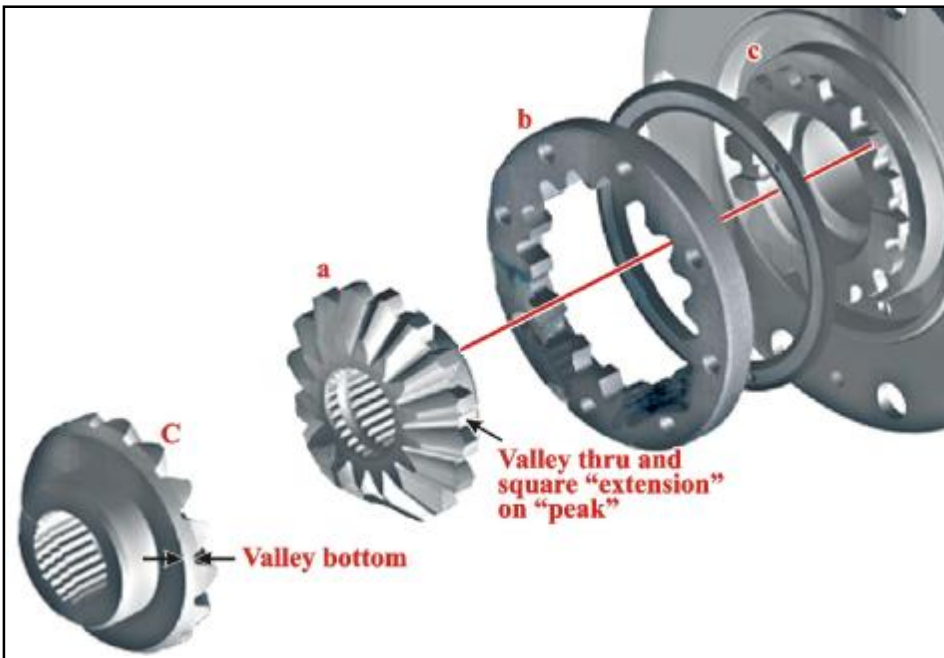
In an ARB air locker, one axle gear (a) is locked to the diff case flange cap assembly via clutch gear movement. The line shows the three parts (a, b, c) that are locked together. Figure 6 shows unlocked (top) and locked (bottom).
